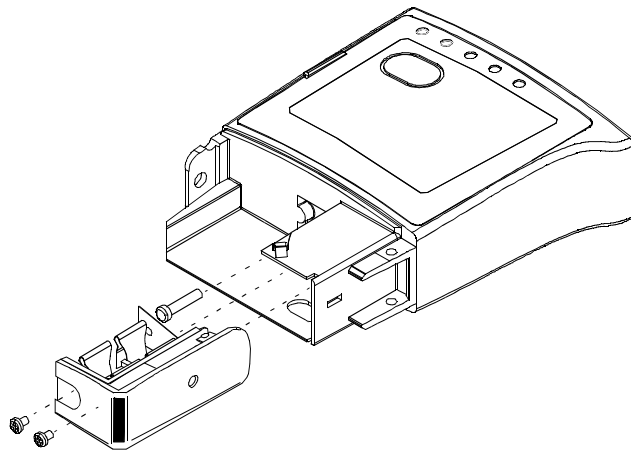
Slide the Battery Contacts into the Case Assembly
